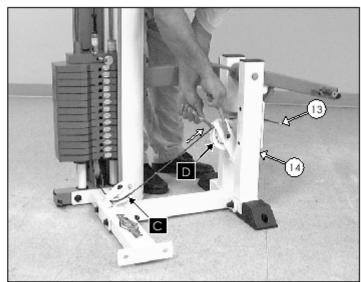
Route the Cable (#13) over a Nylon Pulley 4 1/2" Rd. (#64-Labeled D) and attach the pulley to the Side Frame (#14) pulley bracket using one Hex Head Cap Screw 3/8-16 X 2 (#57), two Flat Washers SAE 3/8" (#46), and one Nylon Insert Jam Lock Nut 3/8-16 (#62).
